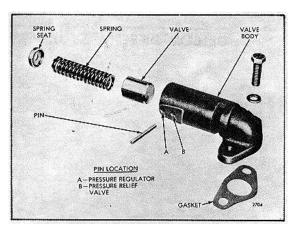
Regulator Valve and Relief Valve Details and Relative Location of Parts (6V or 8V Engine, Oil Pump In Front Cover)
